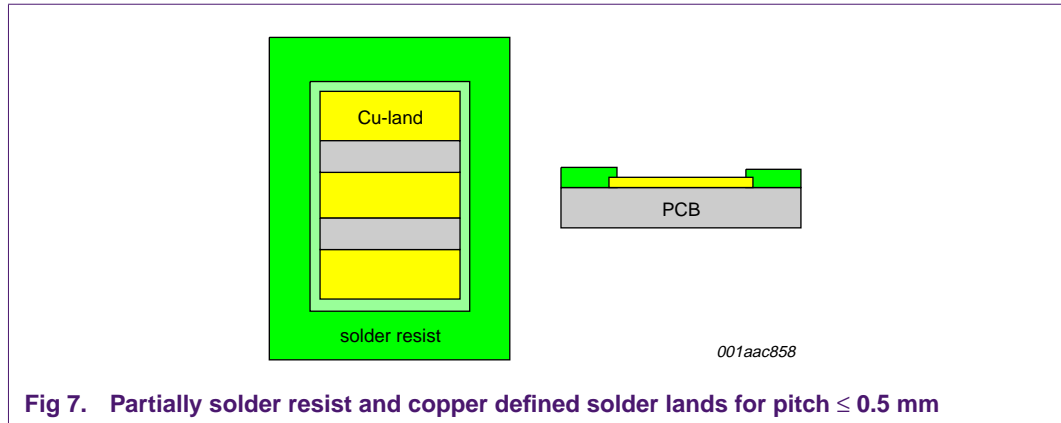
Partially solder resist and copper defined solder lands for pitch  $\leq 0.5$  mm
